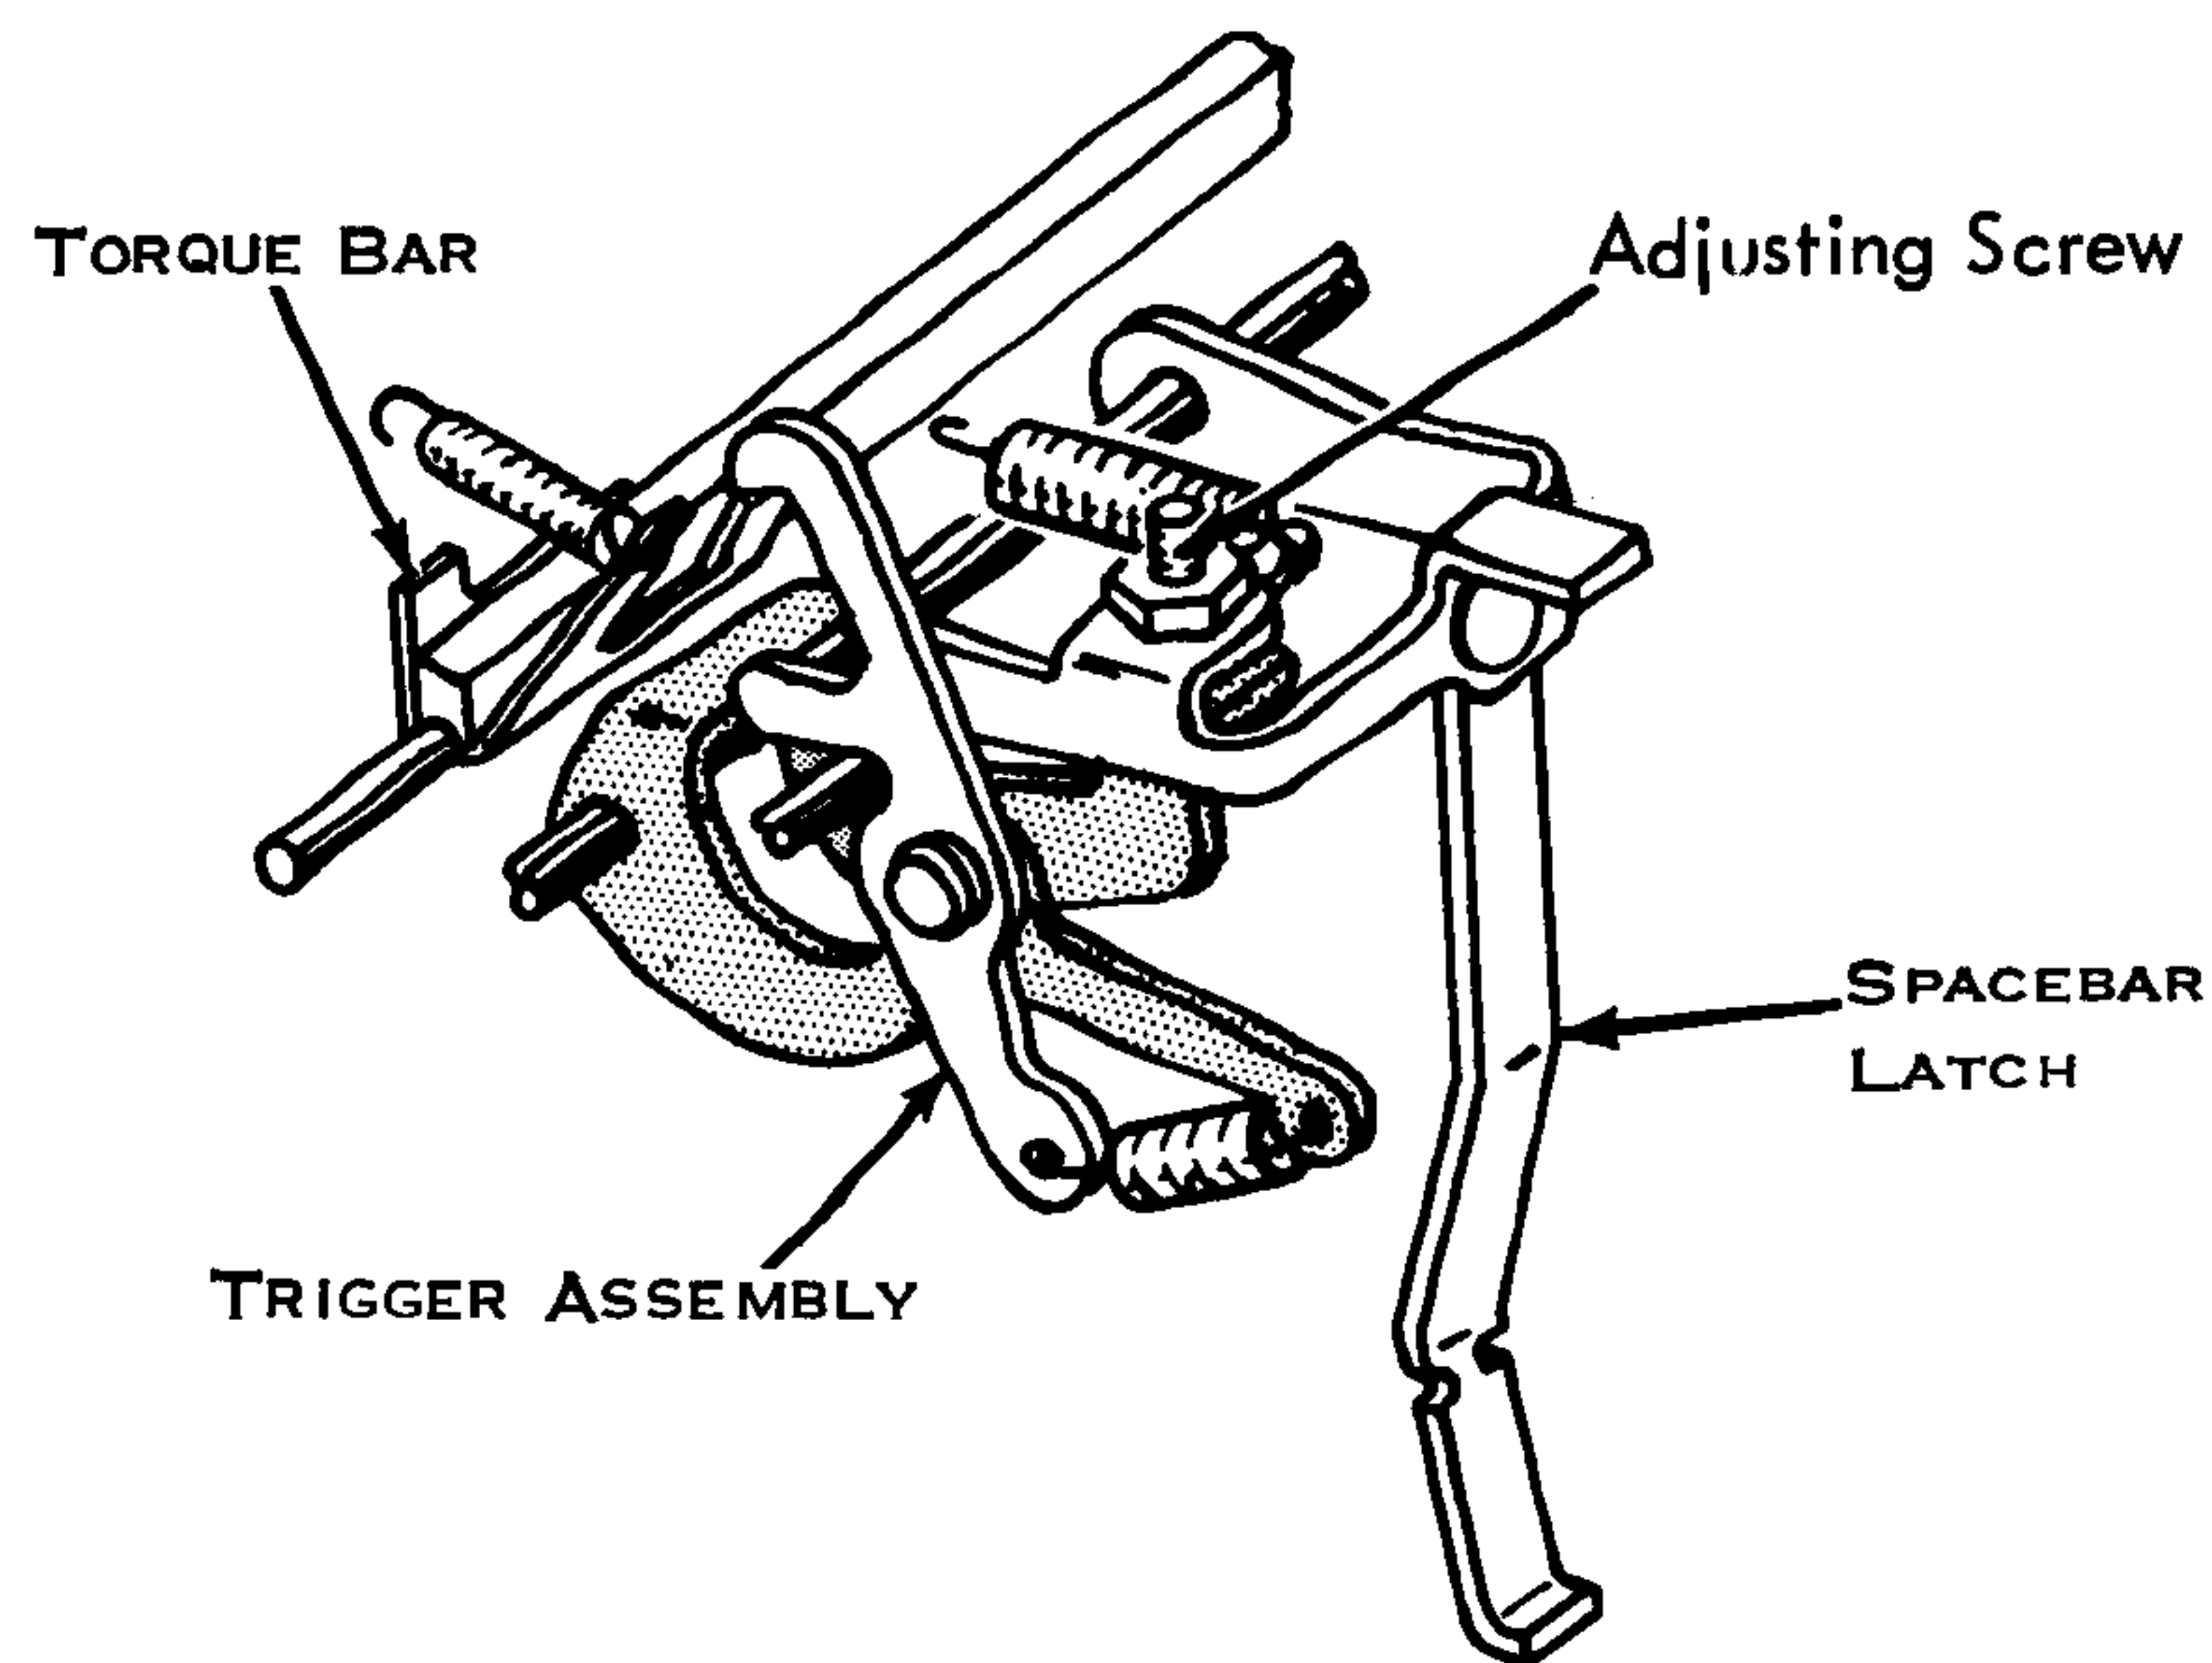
Spacebar Latch Lever Screw, 11 Inch Machine
